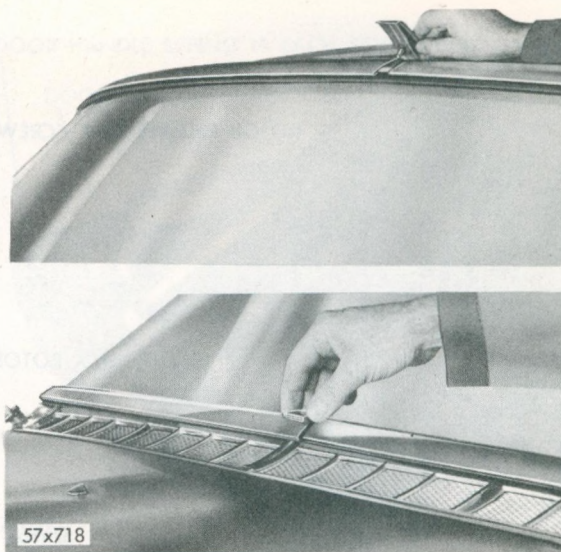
Removing or Installing Upper and Lower Moulding Clips (Imperial Models)
